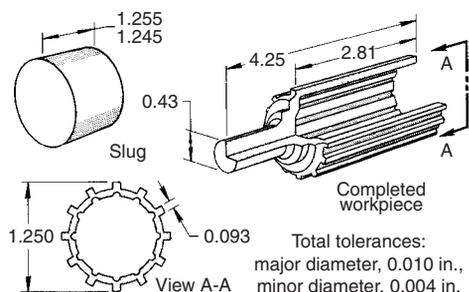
Copper alloy C14500 rotor produced by combined backward and forward extrusion. Dimensions given in inches
